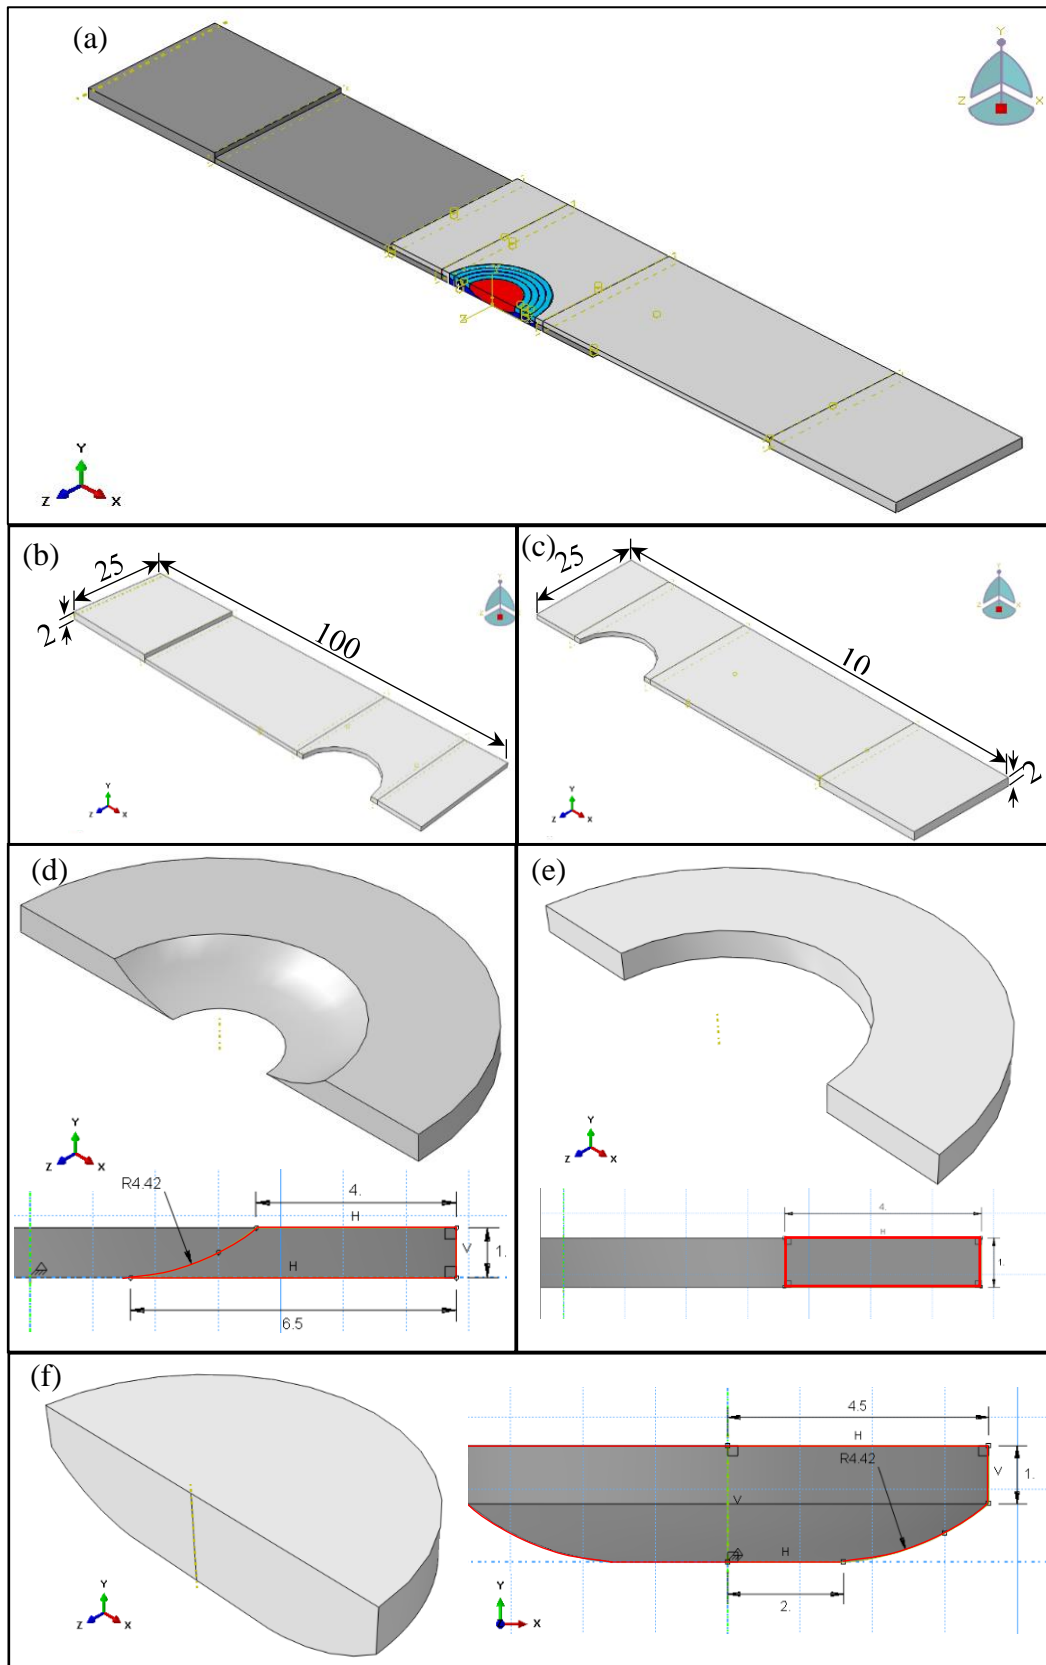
Geometry definition of the different material partition zones used for the similar AA6111 aluminium alloy RFSSW joint model of the lap-shear test: (a) full sample, (b) lower sheet with spacer, (c) upper sheet with spacer, (d) HAZ of the lower sheet, (e) HAZ of the upper sheet, and (f) the SZ.
